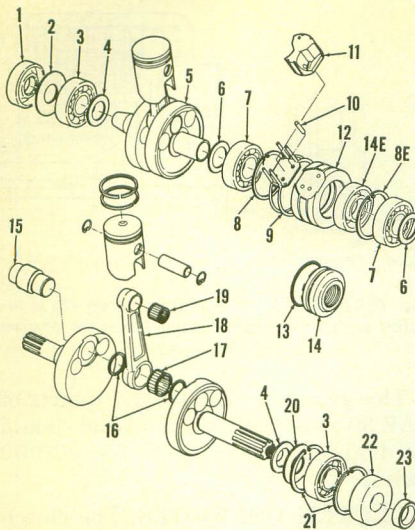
Exploded view of the crankshaft assembly. Parts (8E & 14E) should be discarded if later type seal (13 & 14) is installed.
